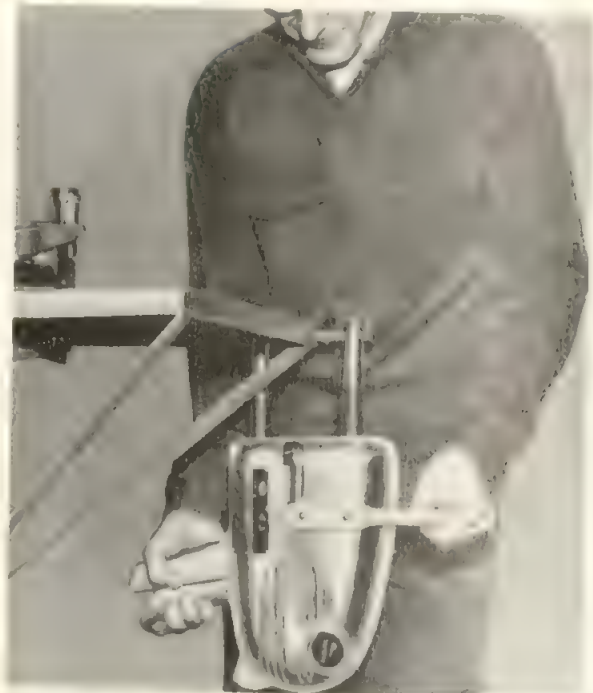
Rocker arm spot welding machine.
